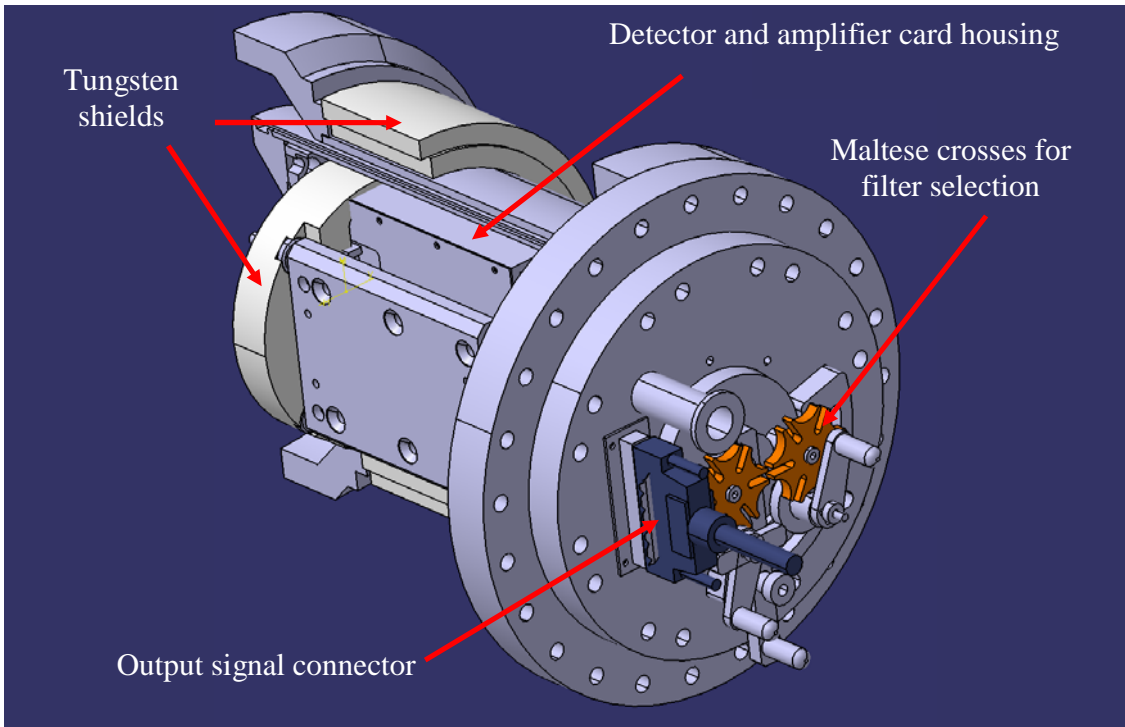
Rear-lateral view of the equatorial HXRS camera in a CATIA © mechanical drawing.
